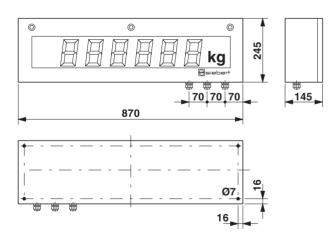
Dimensions of display S302 ... (dimensions in mm)
